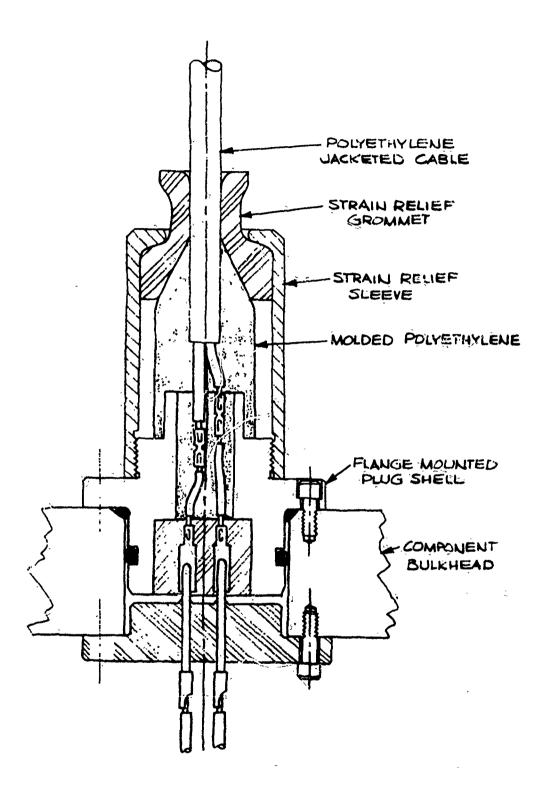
Flange Mounted Polyethylene Molded Plug Penetrator
